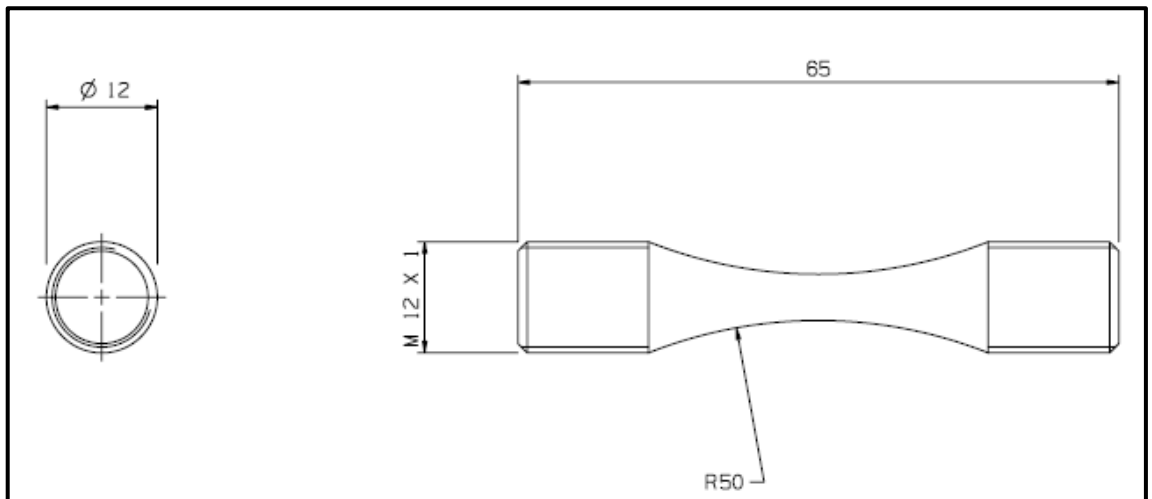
Drawing of Machined Fatigue Test Specimen.
